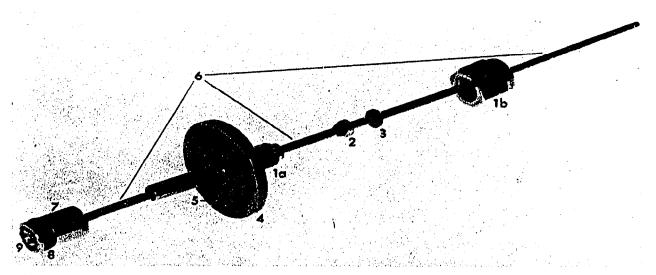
Design of the adjustable plug. 1a, b = Reducer 100-R-2-316; z = front ferrule 103-1 (Zytel); 3 = back ferrule 104-1 (Zytel); 4 = 316 stainless steel plate, thickness 2 mm; 5 = viton O-ring, parker size o14 (012); 6 = injection tube; 7 = plug; 8 = viton O-ring, parker size 06 (003 for 4 mm columns); 9 = projections in the plug.
